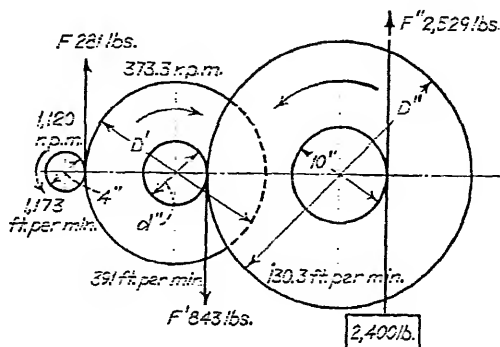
Ten-horsepower drum-hoist gear drive.
